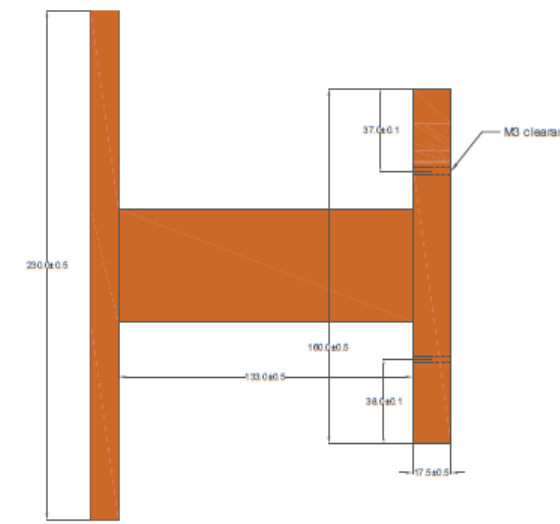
Pre-machined copper heat sink with TEC mounting plate holes indicated
